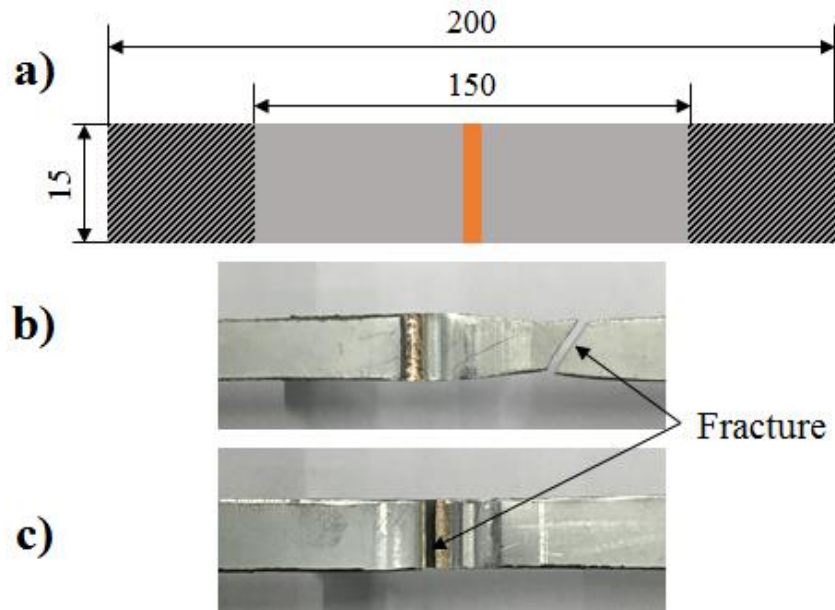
(a) Schematic view of prepared specimen for tensile test (dimensions are in mm), (b) base metal fracture mode, (c) brazed bead fracture mode.
